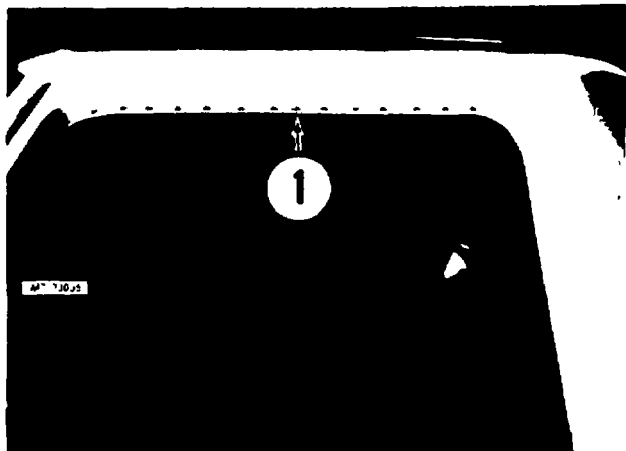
Side Panel to Roof Inner Panel Spot Welds
